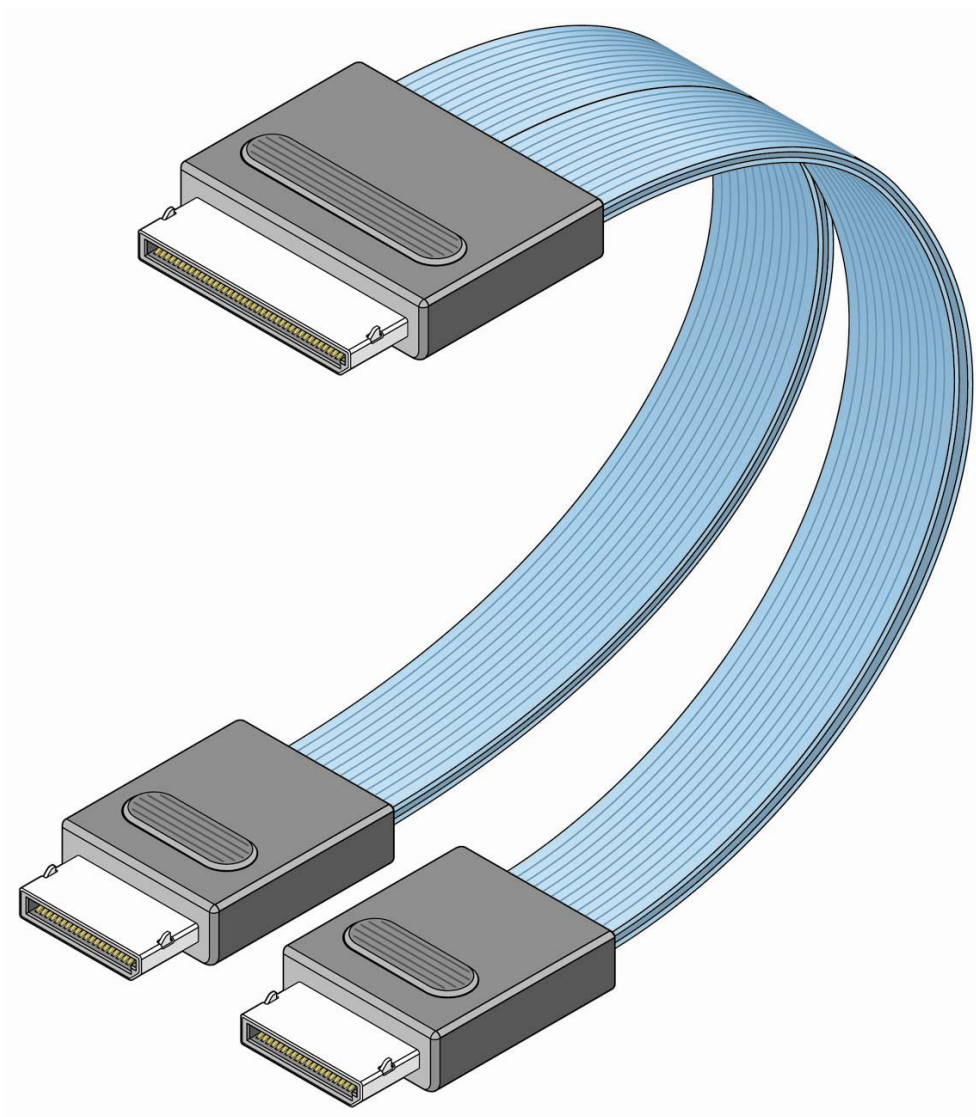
8X TO (2) 4X FREE CABLE ASSEMBLIES
